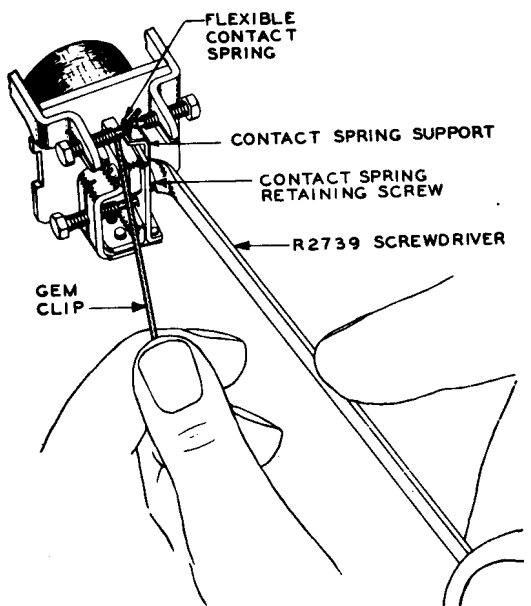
Method of Aligning the Contact Spring and Contact Spring Support
